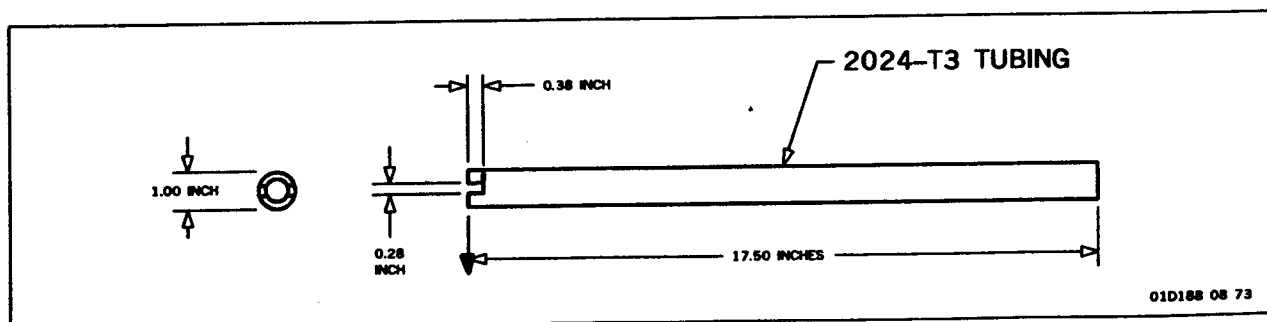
Hydraulic Hand Pump Handle Fabrication
